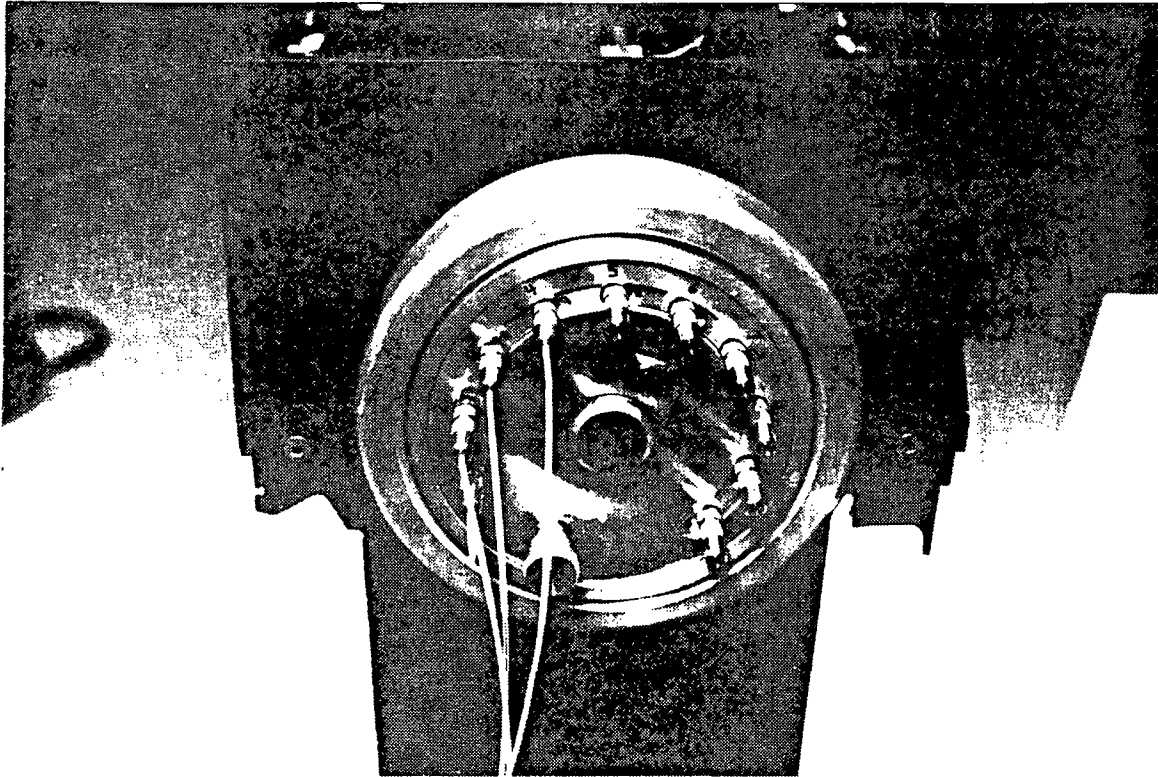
Turret Drive Assembly, Indiana, Pennsylvania
